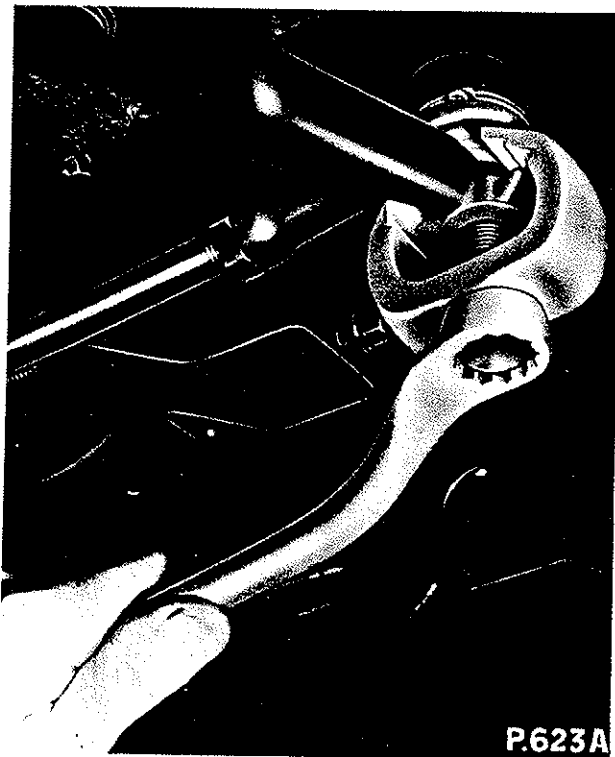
Disconnecting the side steering rod at the intermediate relay lever using the Churchill Extractor R.G.284
